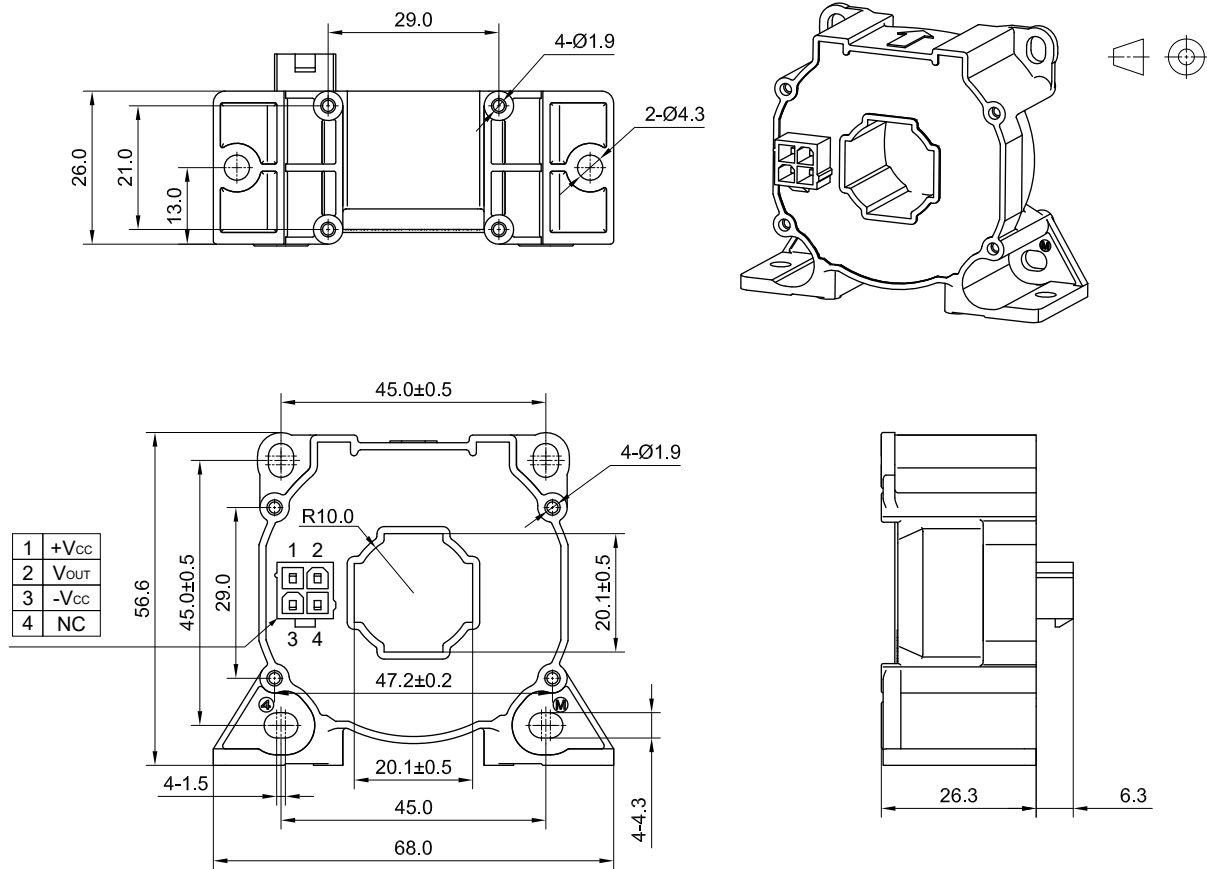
Dimension (unit: mm, tolerances for unmarked scales ± 1 mm)
